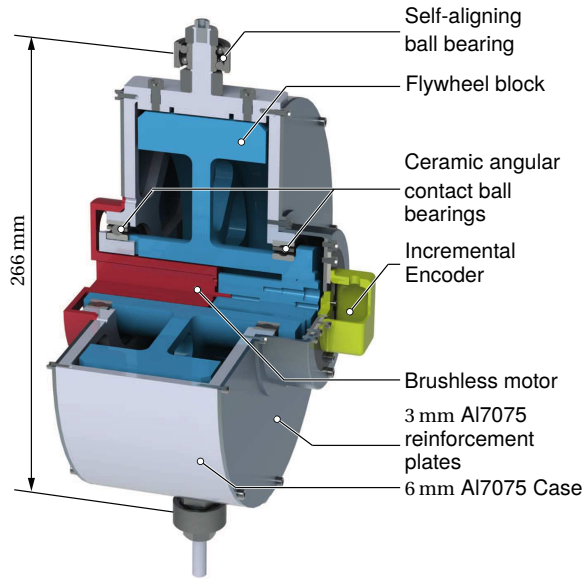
A section view of the flywheel prototype. The flywheel block (in blue), includes the rotational parts such as the flywheel itself, coupling to the motor and the housing for the magnet of the absolute-encoder. The motor block (in red) includes the brushless motor and its housing. The gimbal structure (in light gray), includes the Al-7075-T6 case and reinforcement plates. Self-aligning bearings are placed in each end of the gimbal axis (top and bottom).
